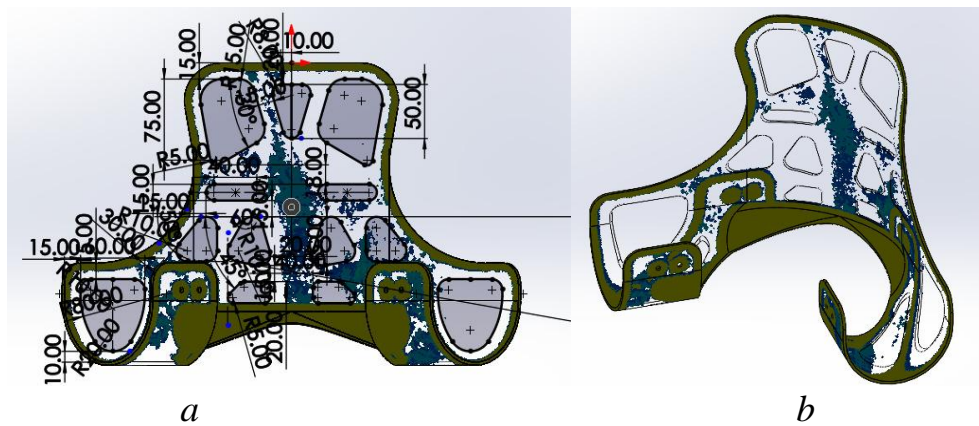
Redesign process: dimensional overlay on optimization results for manufacturing guidance: *a* – sketch on the body for cutting material; *b* – result of cutting the material
